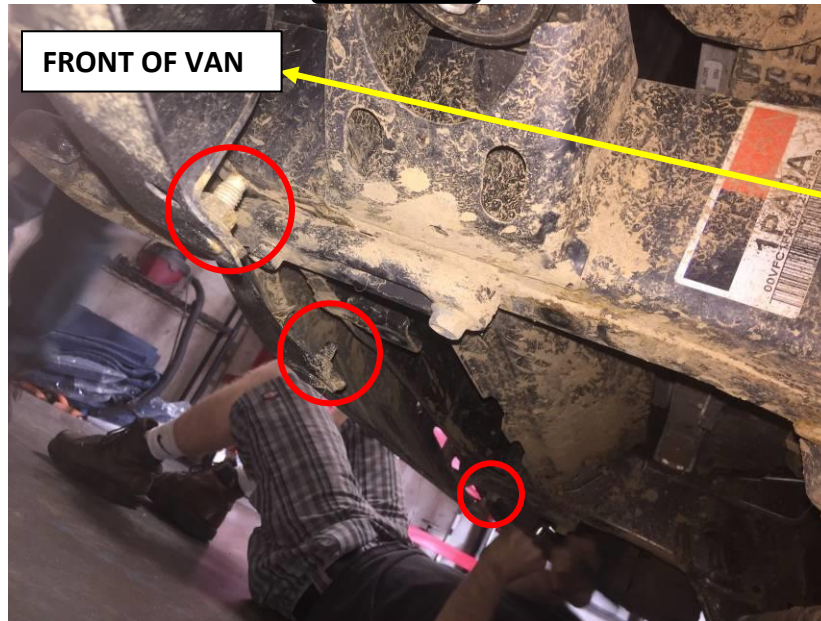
Bolts fastening the bumper to another support piece (4th bolt not pictured, out of frame to the left of the image)
